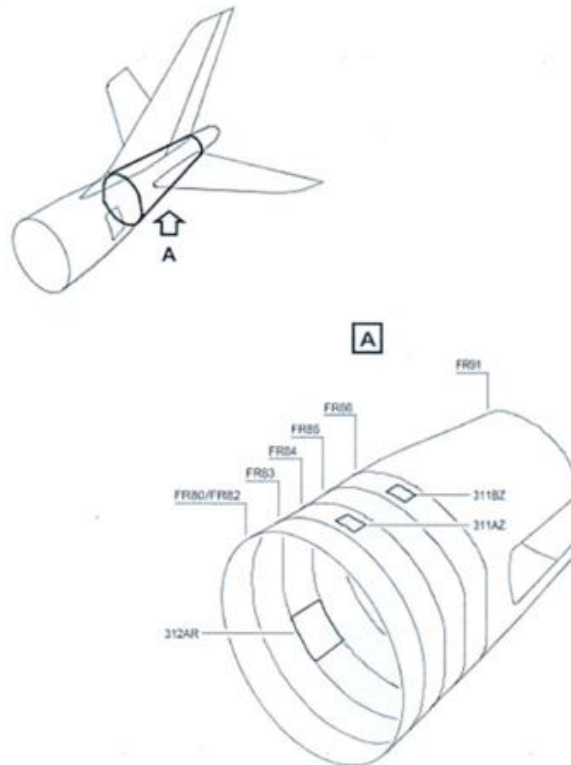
A / SHEET 1 / 1 - Access Panel on the Fuselage Aft Tail-Section
